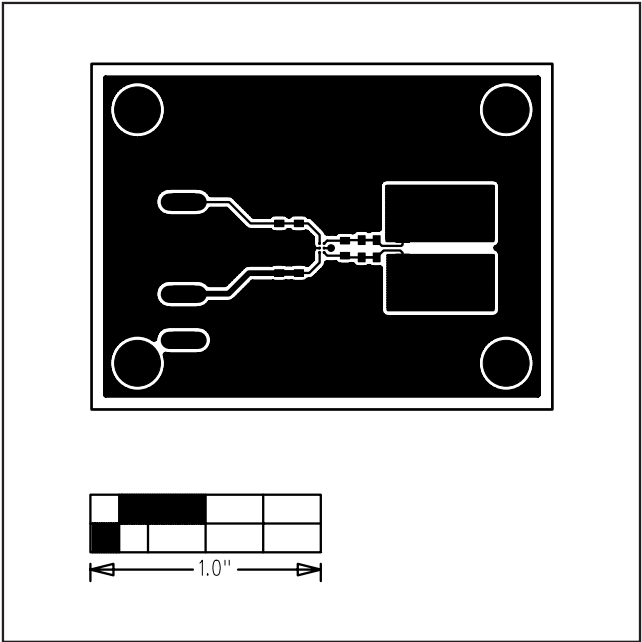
MAX9928 EV Kit PCB Layout—Component Side
